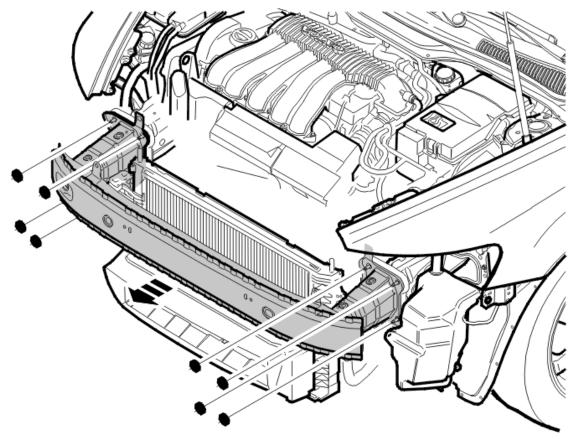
Removing Front Bumper Rail Courtesy of VOLVO CARS CORPORATION
